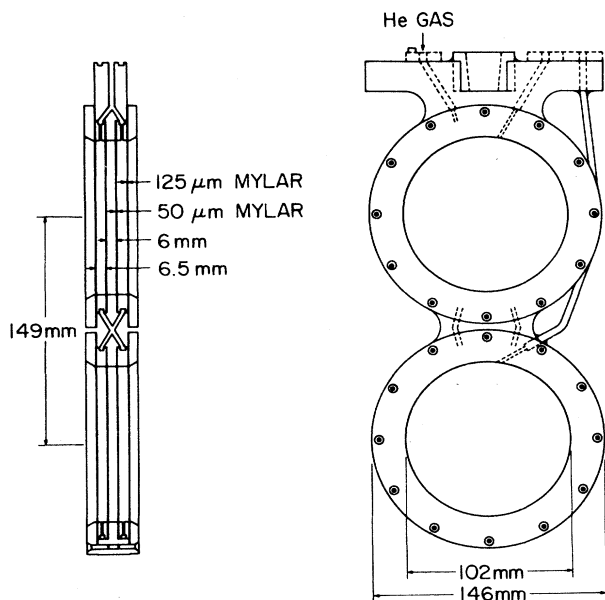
Details of the liquid deuterium (LD_2) target assembly.
